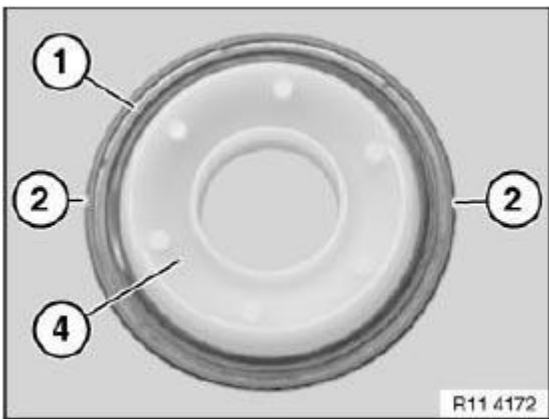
Identifying Crankshaft Radial Seal, Grooves And Bushing
